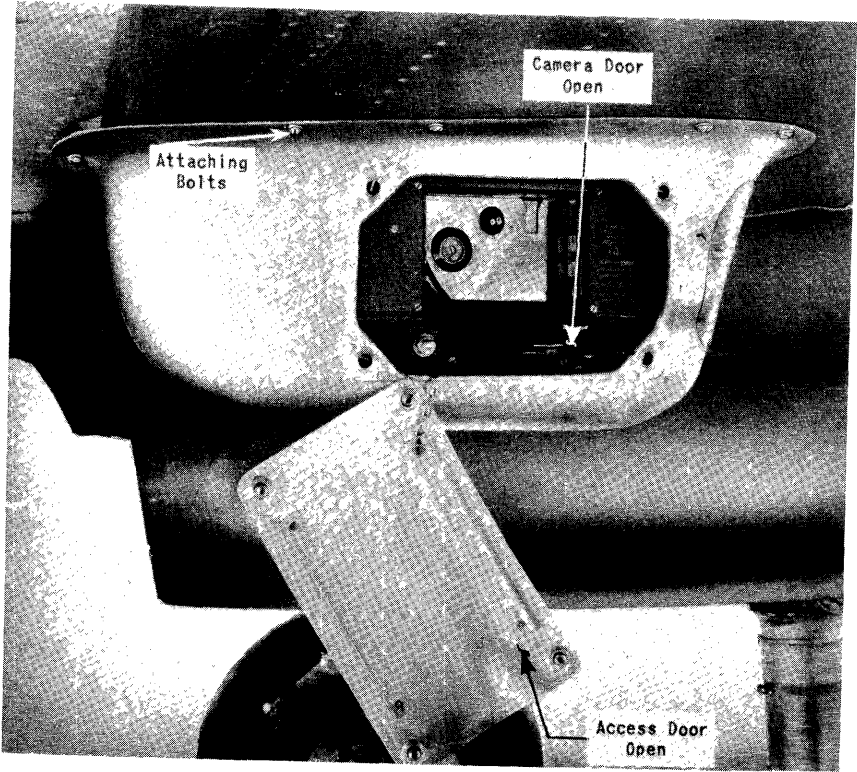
G-45 Gun Camera and Fairing Mounted on Wing
